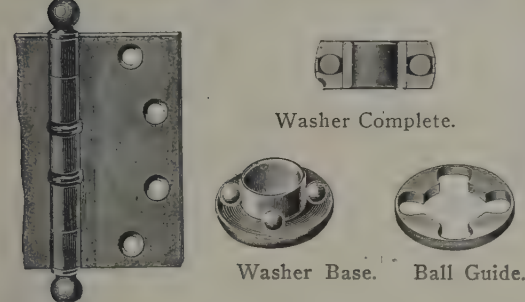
Loose Pin Butt Hinge with Ball Bearing Washer. R. & E. Manufacturing Company.
